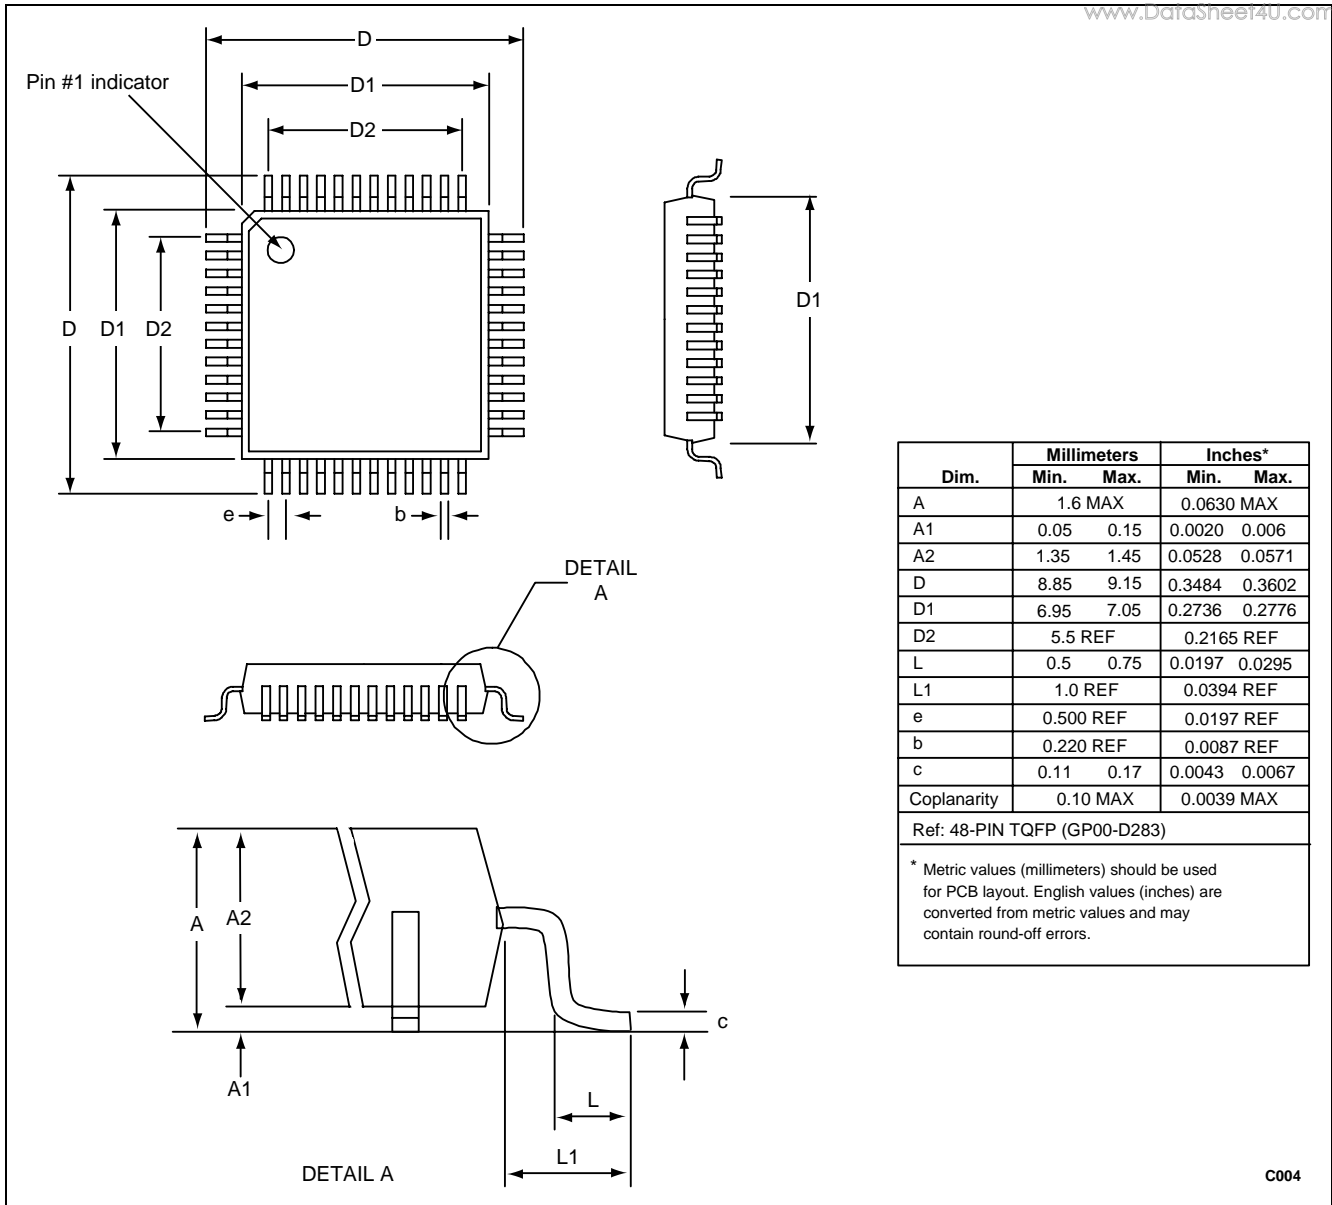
RF137 Package Dimensions - 48-Pin TQFP
